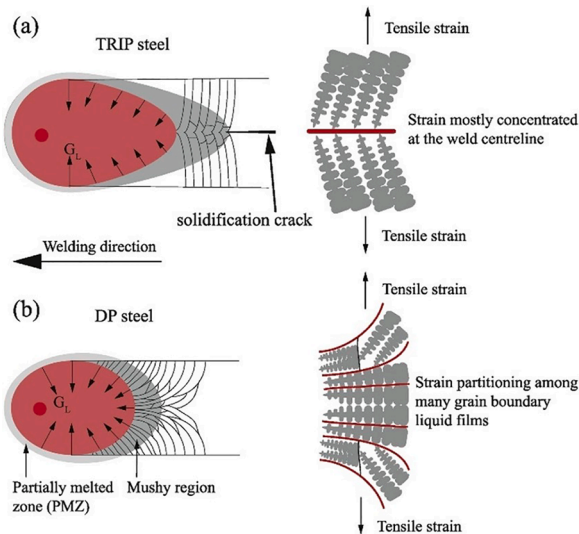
Teardrop weld pool shape, b) Elliptical weld pool shape (Agarwal et al., 2019).
